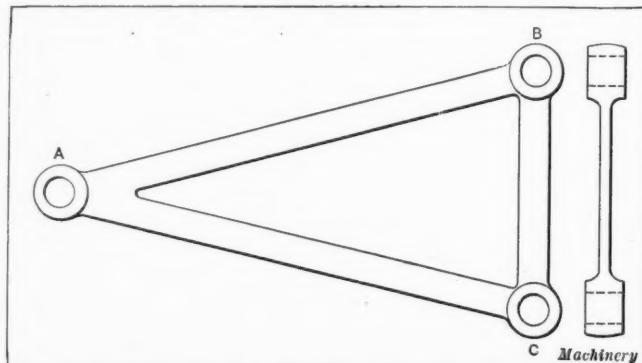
Malleable Iron Casting with Three Cored Holes to be bored
